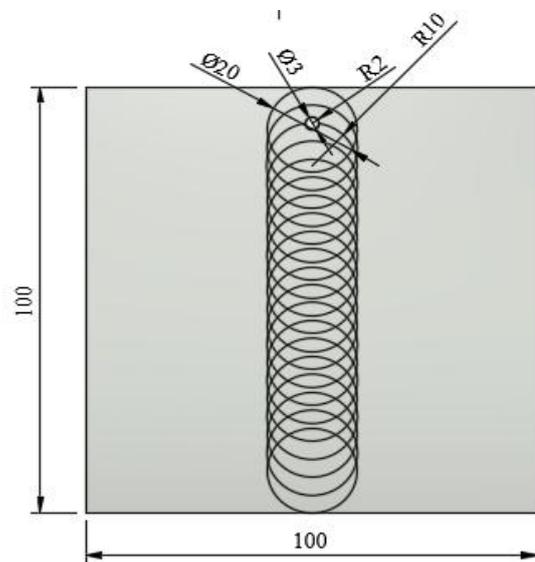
Schematic of FSW Welding Process for 5083-6061
